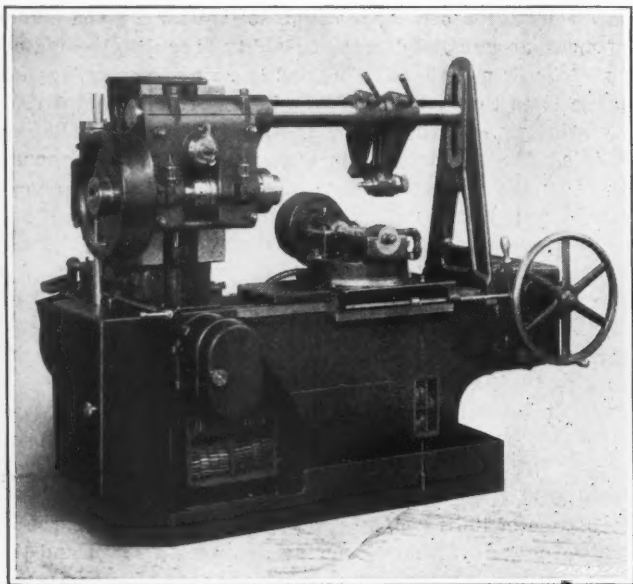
Sixteen-inch Gear-hobber built by the Cincinnati Gear Cutting Machine Co.
